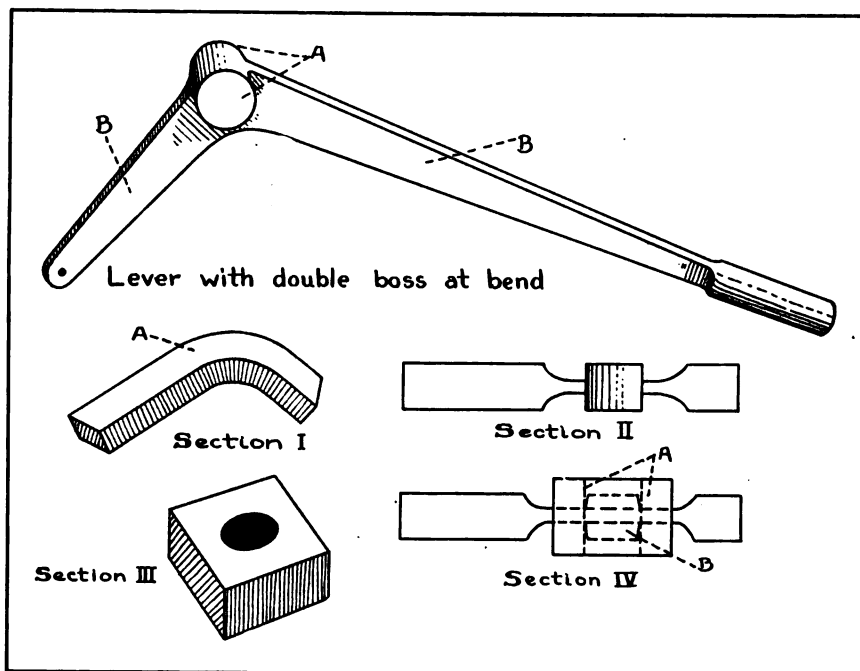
FORGING OUT A LEVER ON THE POWER HAMMER
